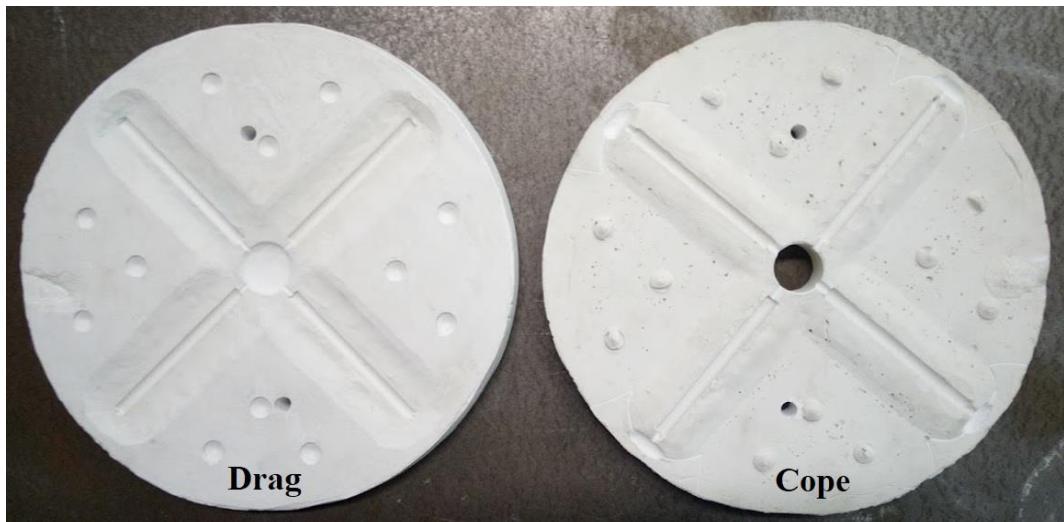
Plaster mold with central gating system for centrifugal casting of four bimetallic semi-finished products in one casting cycle
